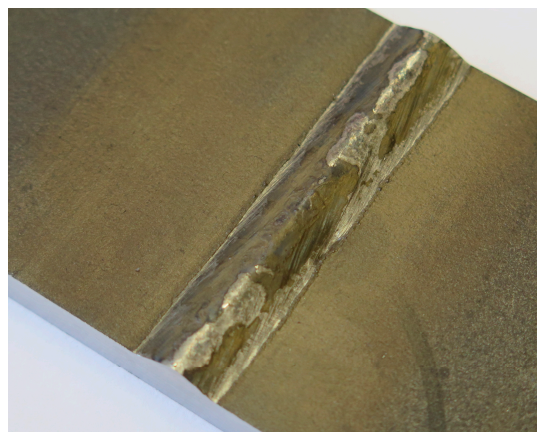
Specimen with weld toe exhibiting a local undercut [47].
